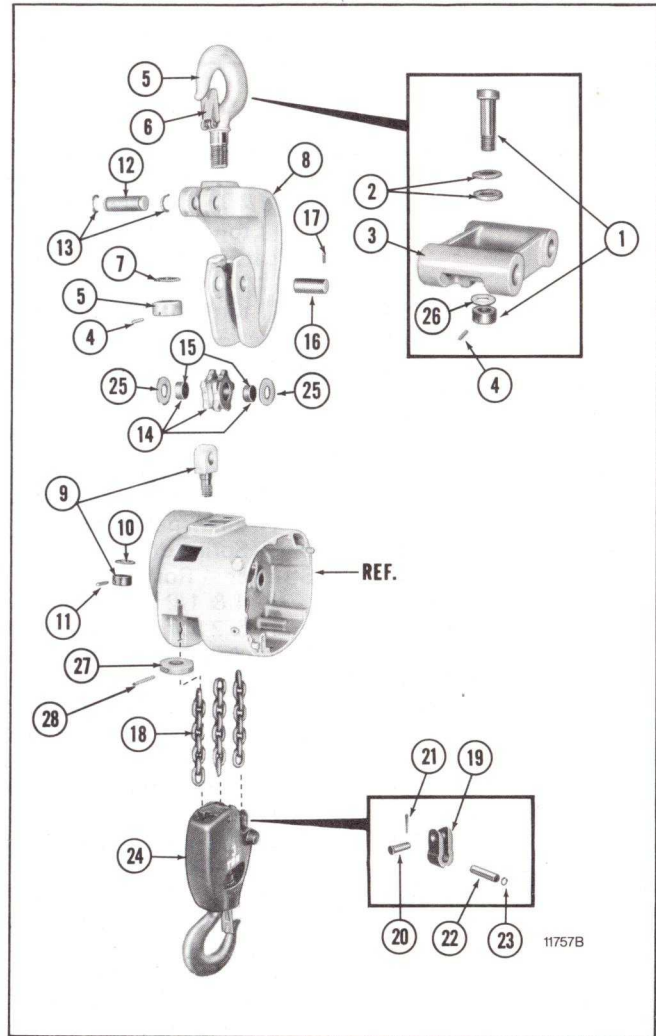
UPPER SUSPENSION, LOAD CHAIN AND LOWER BLOCK PARTS
